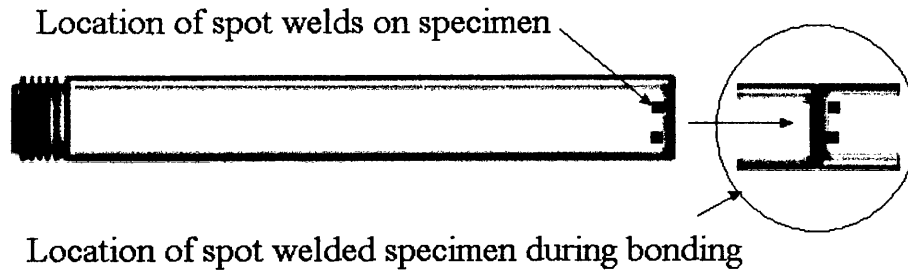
An illustration of the location of spot welds on Gleeble specimens.
